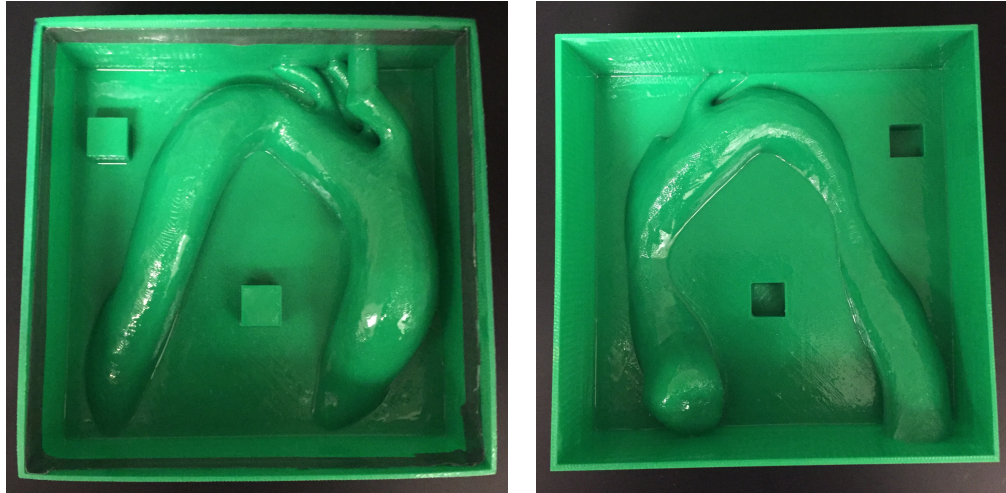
3D printed boxes of Part A (left) and Part B (right) with Reynold's Advanced Materials XTC-3D coating. Part A has an extension piece taped to the top of the box.
